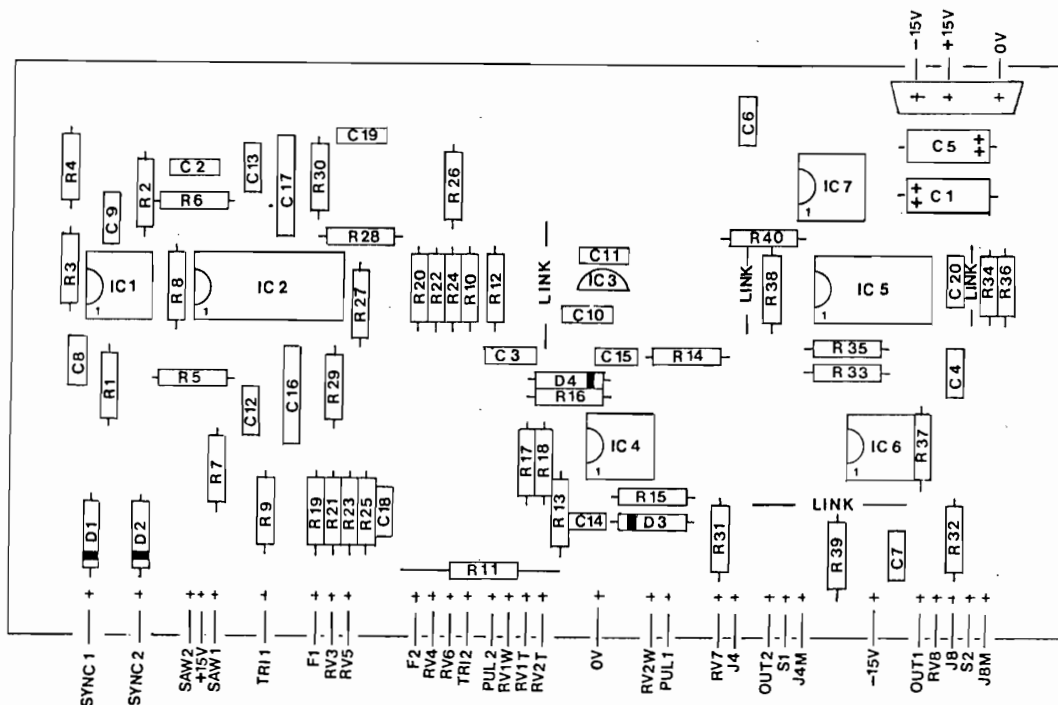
80-19 PCB COMPONENT LAY-OUT
